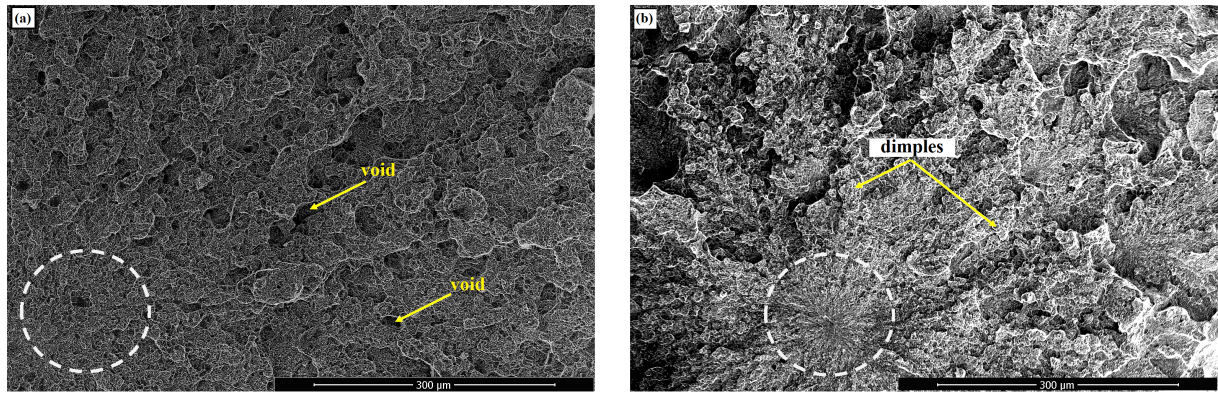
General view at low magnification of hydrogen-charged bearing steel fracture surface showing fish-eye in: a) 100Cr6 and b) 100Cr6+0.5V. The dashed circles indicate origin of fracture.
